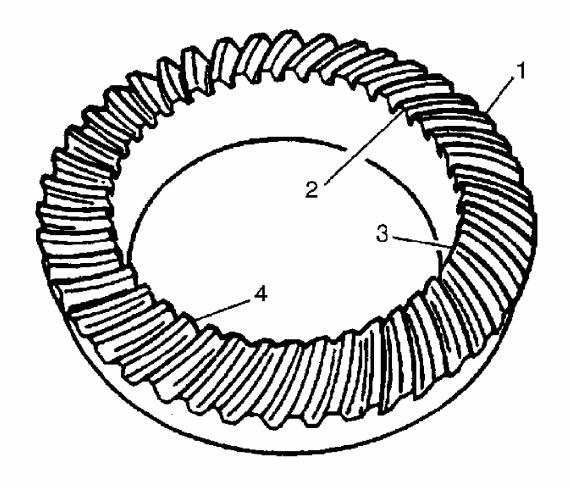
Defining Gear Tooth Nomenclature Courtesy of GENERAL MOTORS CORP.
